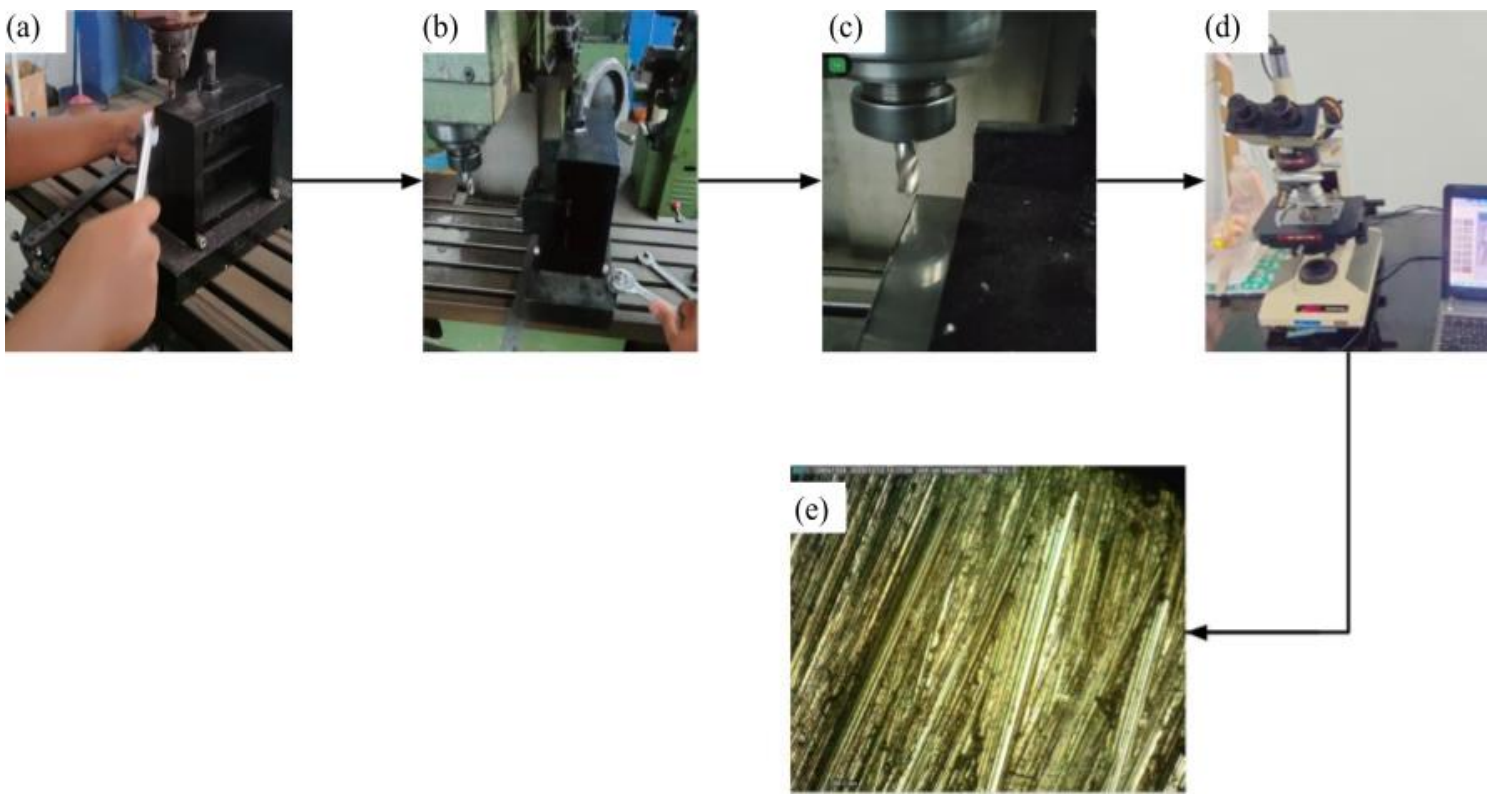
Macroscopic observation setup for burr defect characterization. (a) Clamp element, (b) setup milling, (c) machining process, (d) measurement burr defect, (e) burr characterization.
